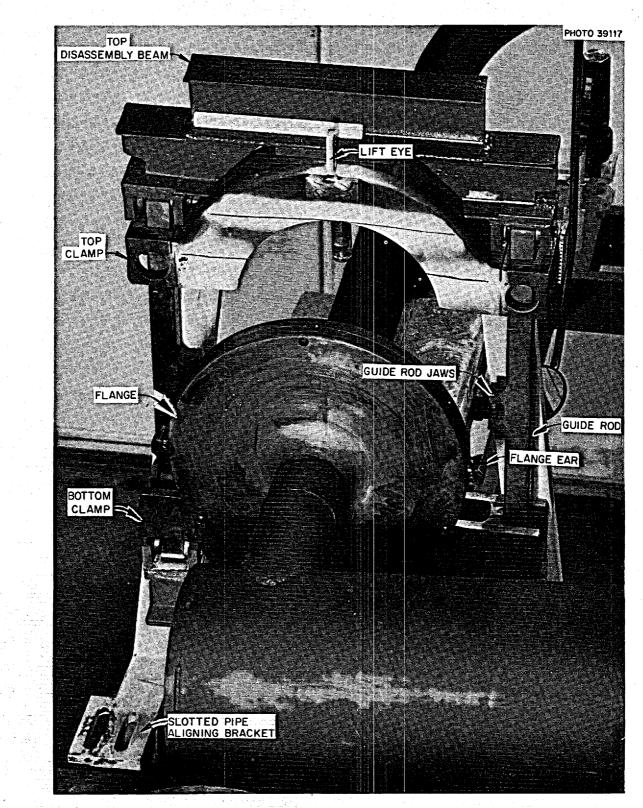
View of Mockup Freeze Flange with Clamp in Stowed Position.
